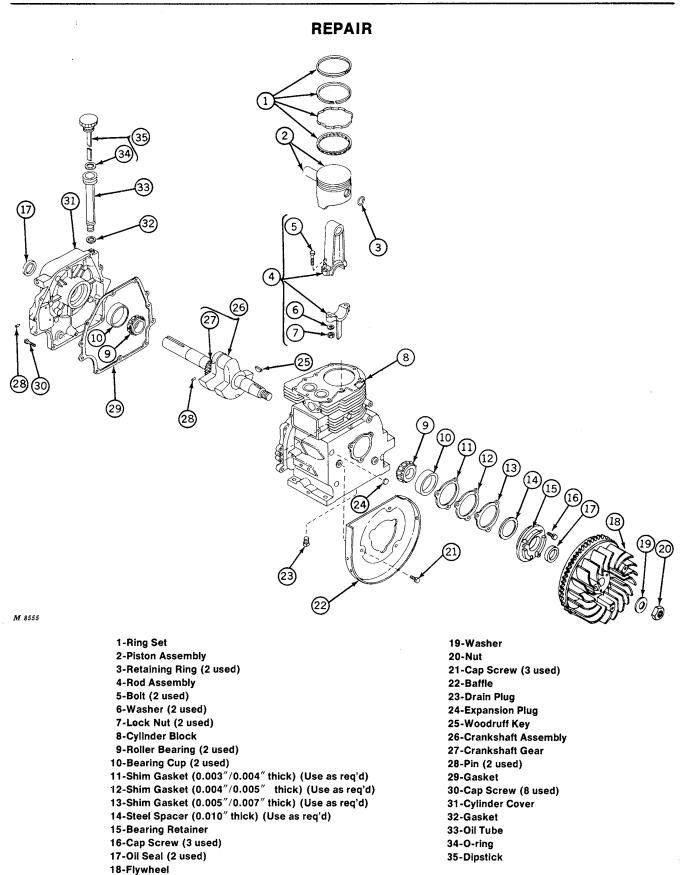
Exploded View Showing Piston, Connecting Rod, Crankshaft, Flywheel, Main Bearings and Oil Seals
